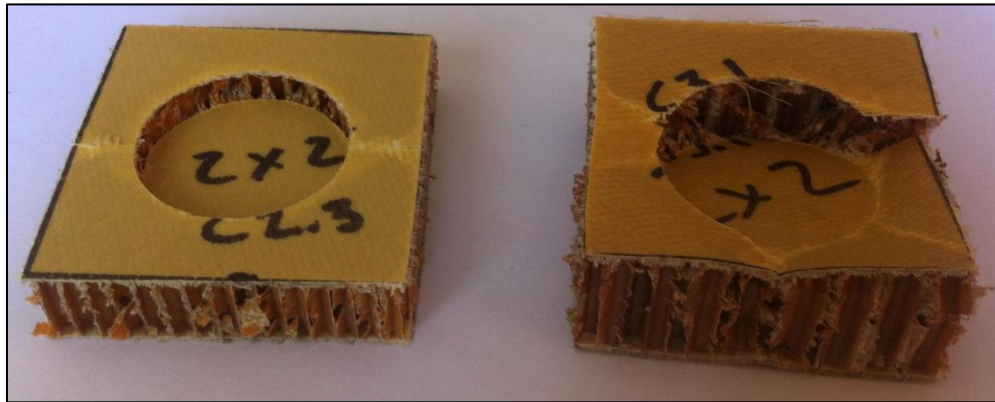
Crushing Failure of Thinner Sample Using Bottom Plate and Thicker Sample Using Bottom Peg
